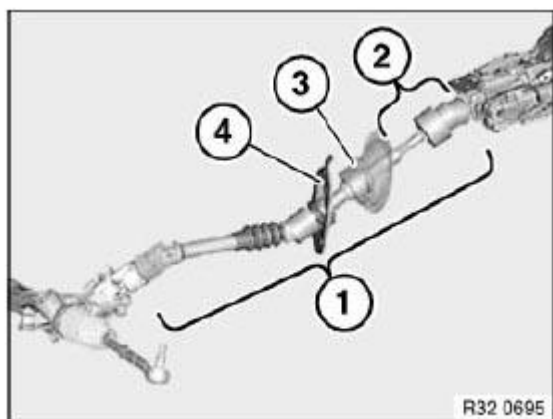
Identifying Steering Spindle Lower Section, Double Joint, Sleeve And Bracket
